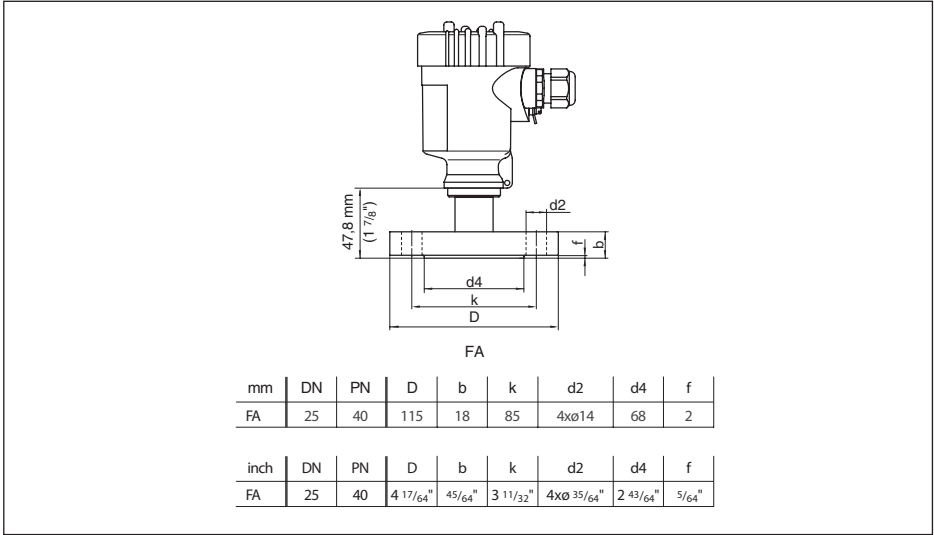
VEGABAR 54, flange connection form B1, EN 1092-1
